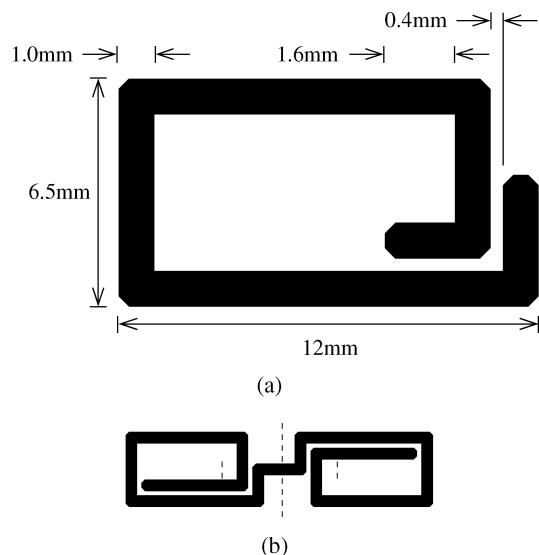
Inductance cancellation winding design for use with the Vishay BC-components 330 nF capacitor. Both the two-layer folded and single-layer unfolded designs are shown. The winding is fabricated from 1-mm-thick copper. (a) Two-layer folded. (b) Single-layer unfolded.
